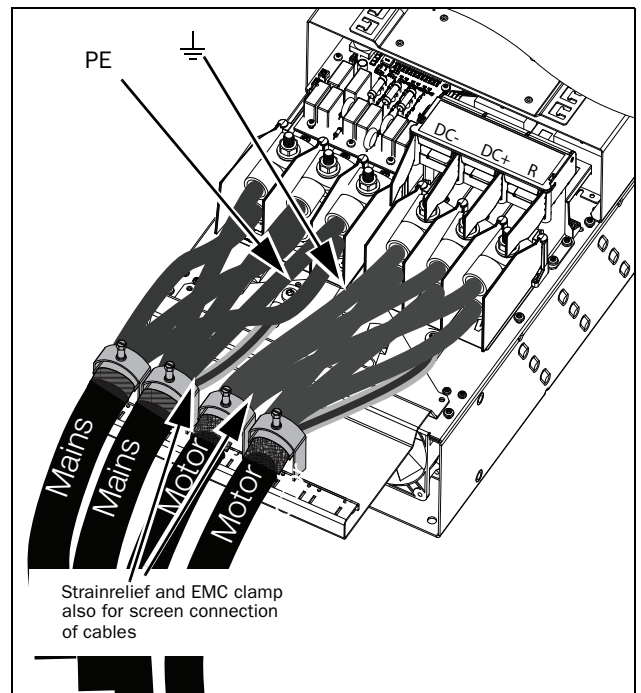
Mains and motor connections model A4200-E3 (frame size FA2) with the optional terminals for DC-, DC+ and Brake (principle drawing)
